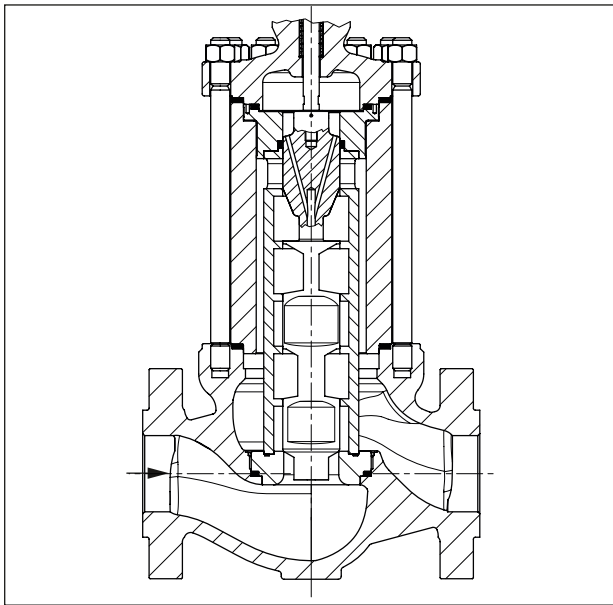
Type 261GR Globe Valve with 6-stage CDST plug and pressure balancing
